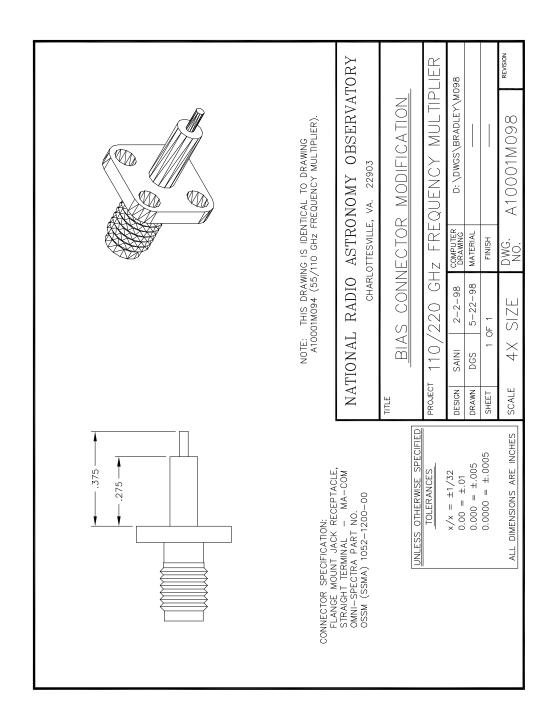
110/220 GHz frequency doubler: Details of the modified SSMA flange mount jack receptacle used as the DC bias connector.
